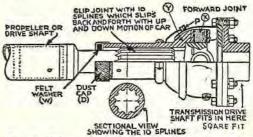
Spicer universal joint showing the forward, or splined end of the drive shaft in place. The right end of this forward joint is connected to the transmission shaft.
